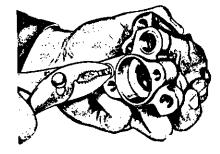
Removing Reaction Valve Plug ASSEMBLY
